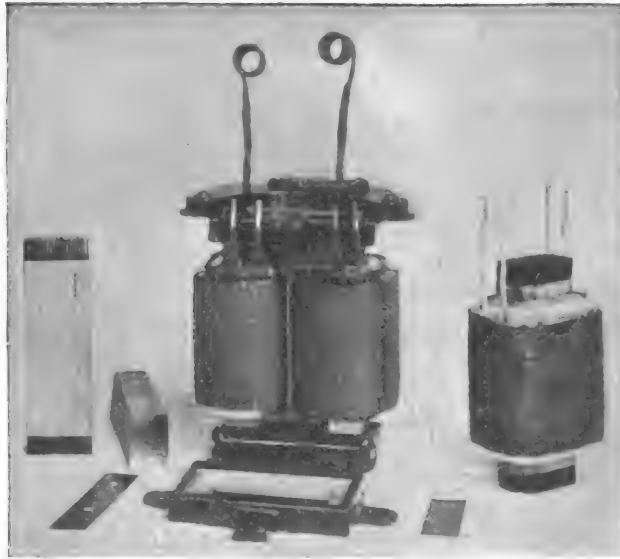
SHOWING CORE AND WINDING, TYPE H TRANSFORMER.
